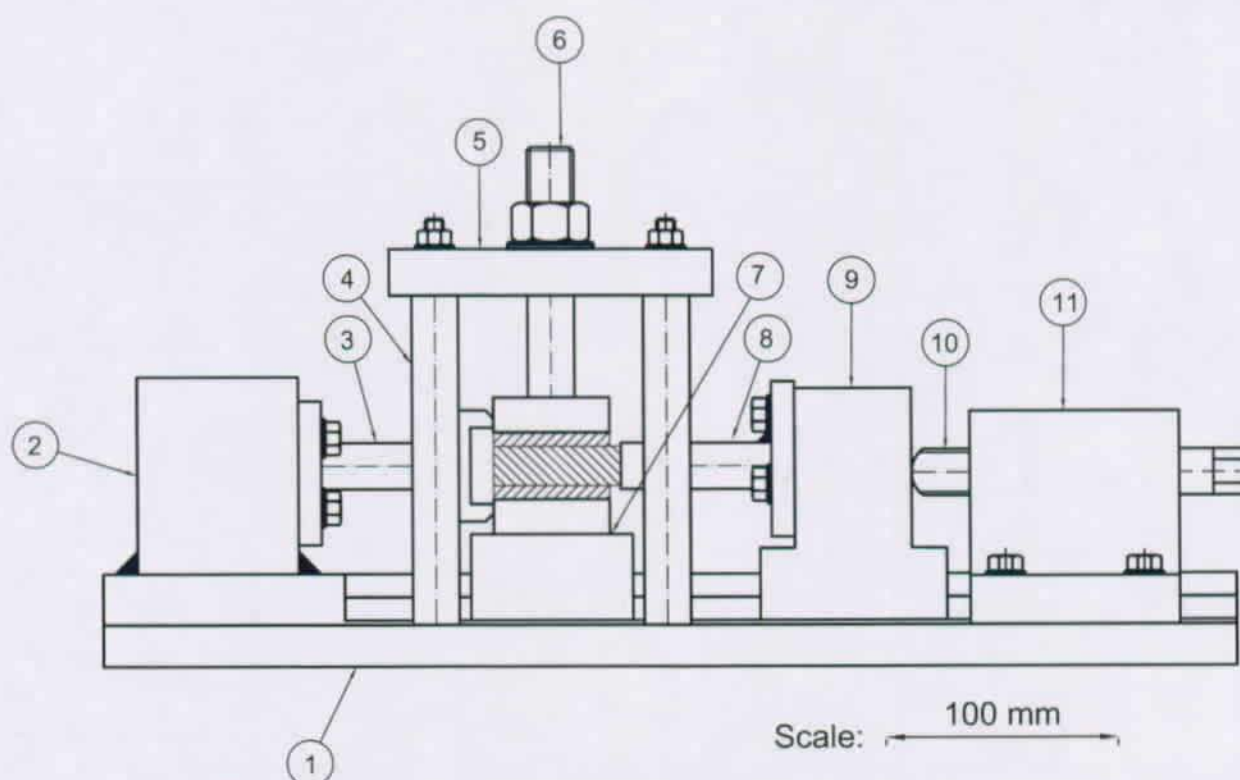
CCLAB TENSILE-SHEAR DEVICE: technical drawing
